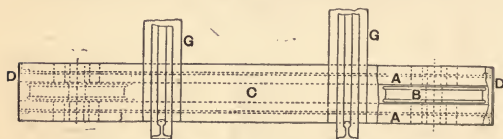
Plan of End Cradle for Heavy Traveller.
